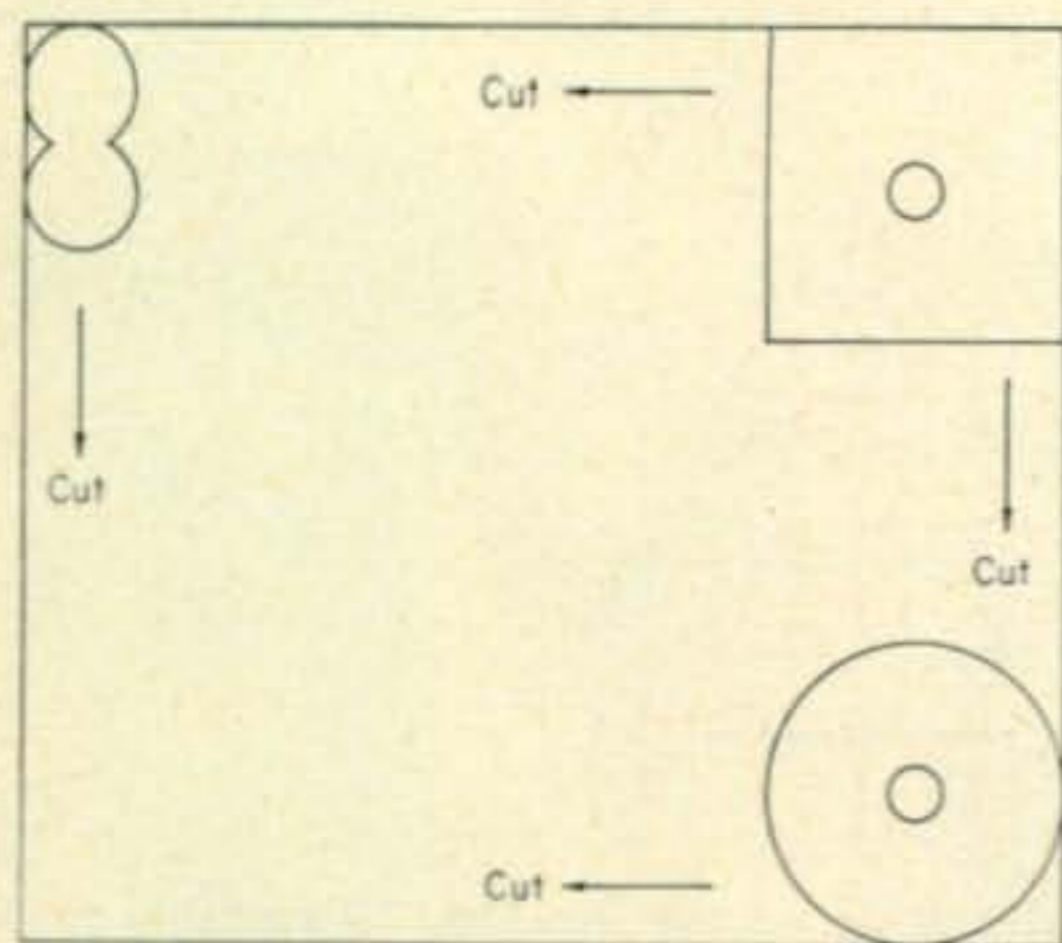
Making a rectangular cutout. Holes should be made at corners using a square or round chassis knockout punch or several smaller size drilled holes. A hacksaw may then be inserted through the holes and used to cut the remainder of the material in the directions indicated. Corners may be trimmed afterwards if needed.
